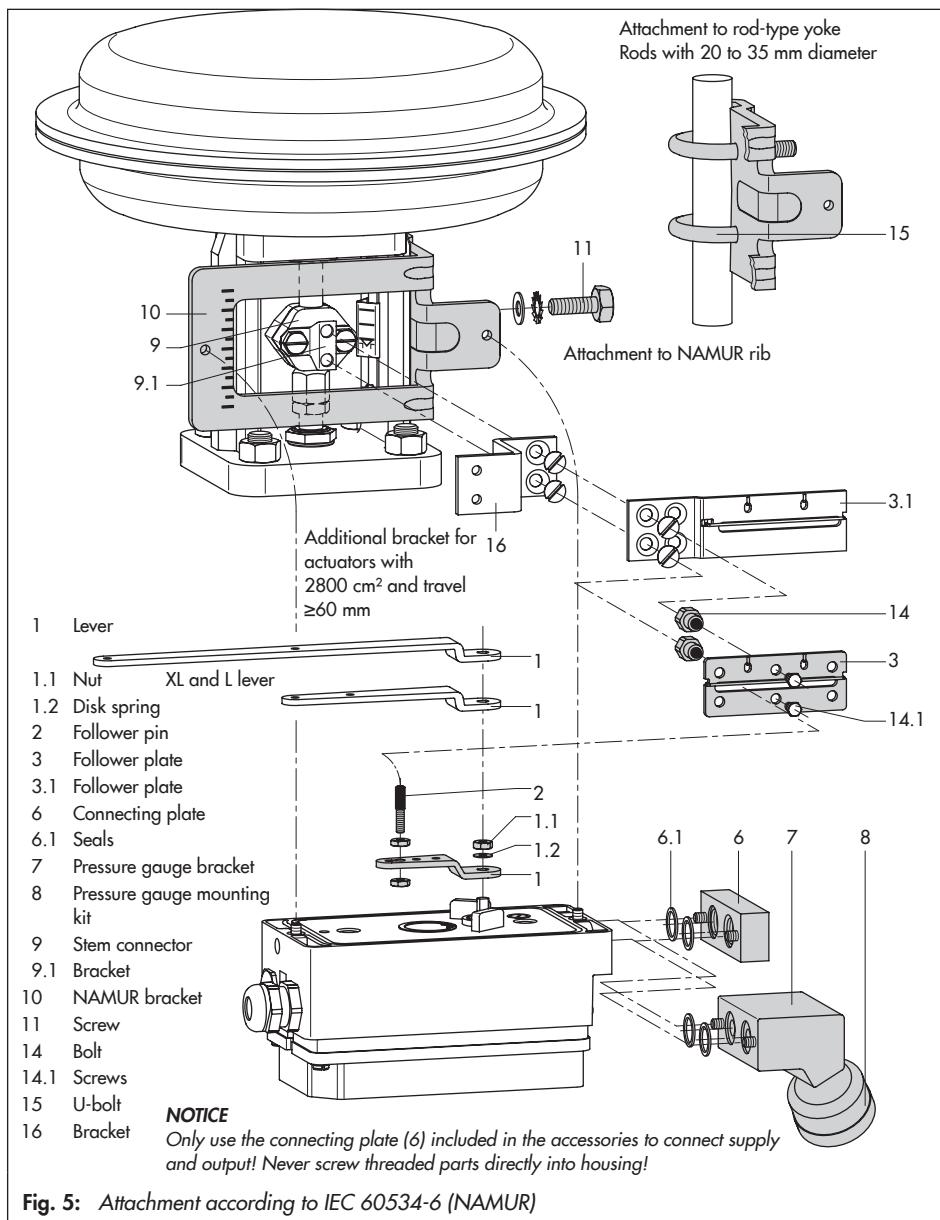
Attachment according to IEC 60534-6 (NAMUR)
